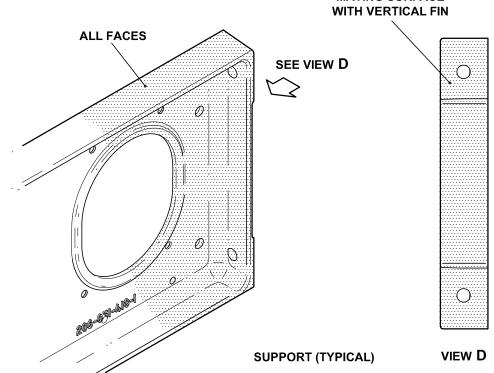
Vertical Fin Attachment to One-Piece Casting Support
